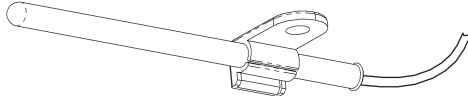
B: Break-Off Tab Used to Mount a Stainless Steel Remote Probe.
